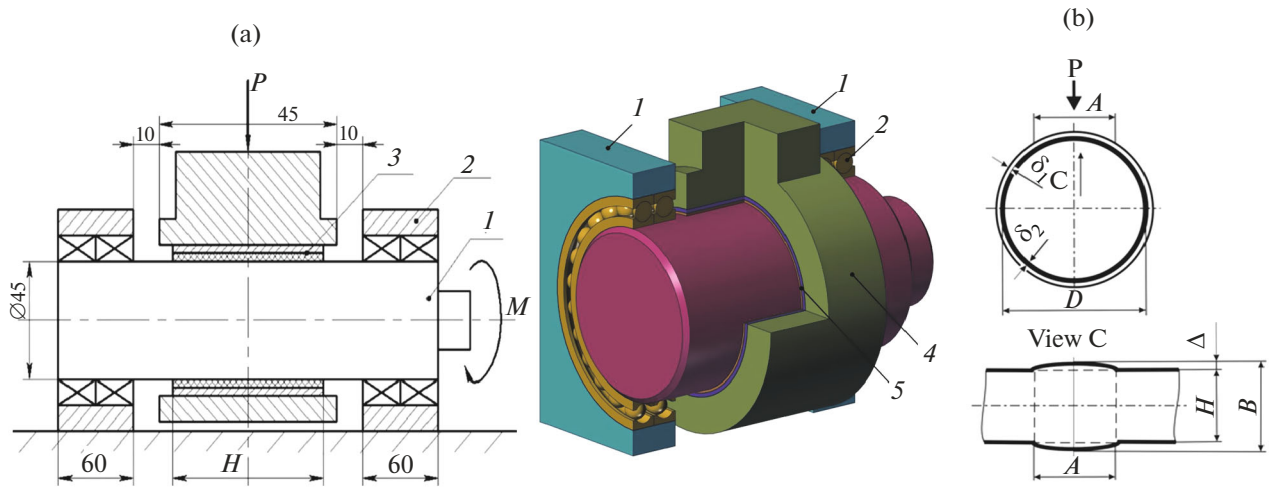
Scheme of the experimental unit (a) and scheme for measuring geometric dimensions after testing (b).
